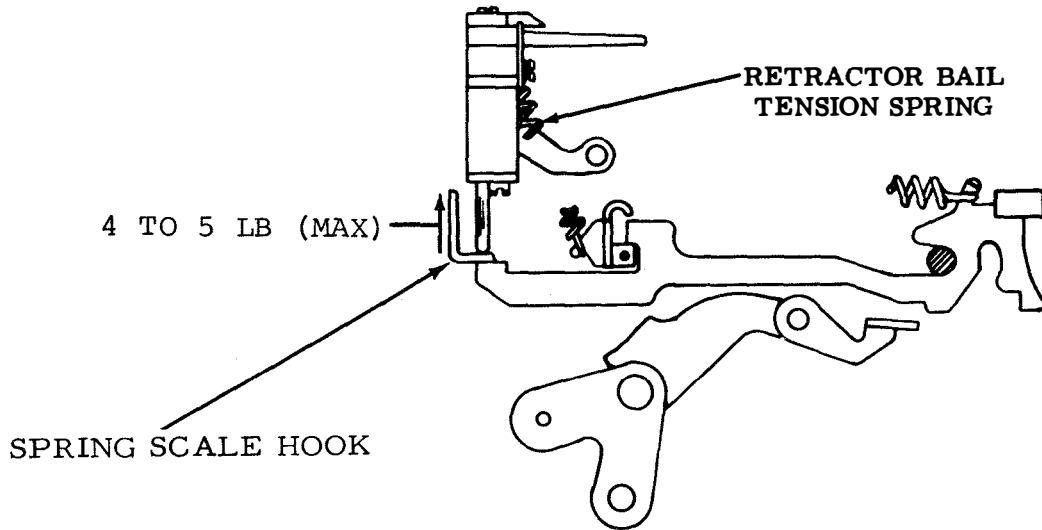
Retractor Bail Compression and Tension Springs (Combined) (For Chadless Tape), Front View
